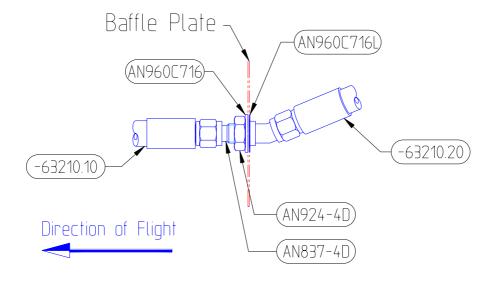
Bulkhead Fitting Fuel Sensing Line Installation
